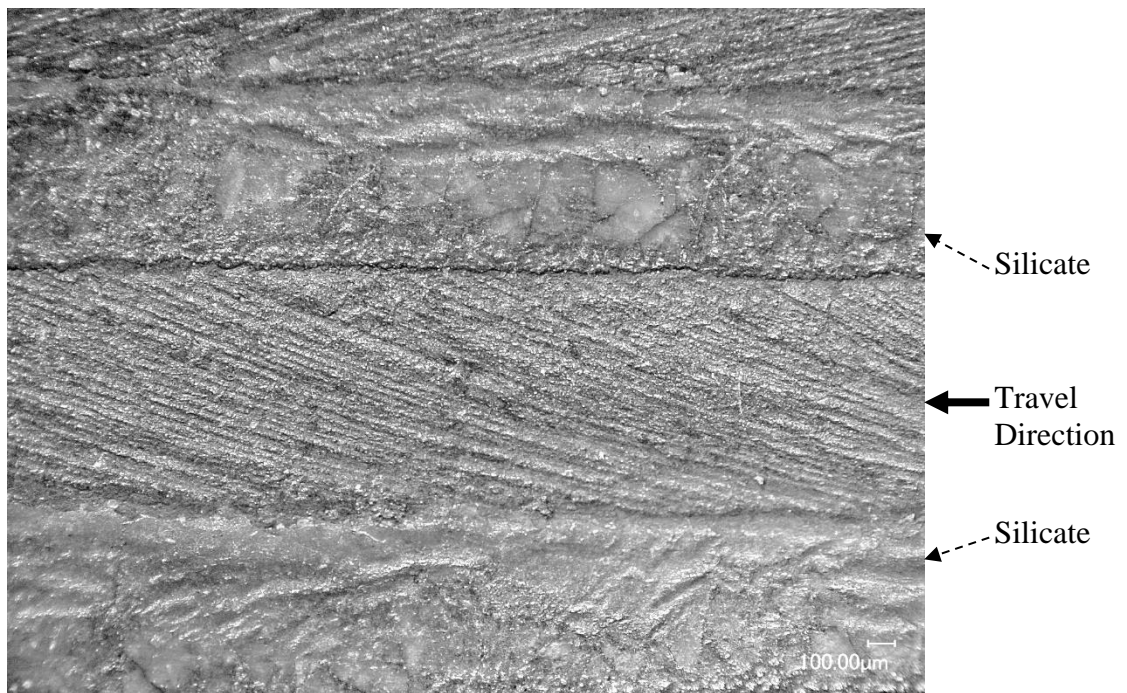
Side view of a single weld bead, showing direction of travel.
